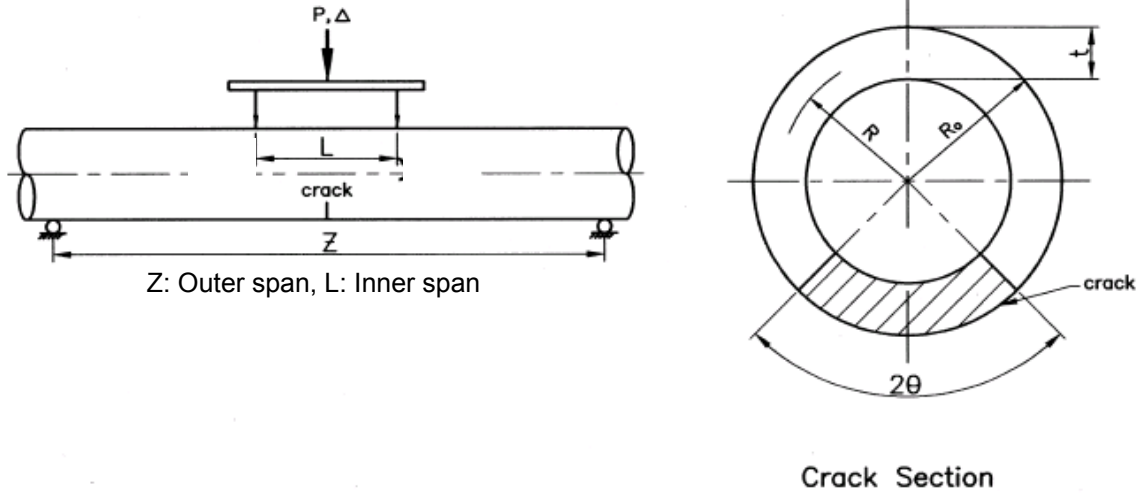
Pipe with throughwall circumferential crack under four point bending load
